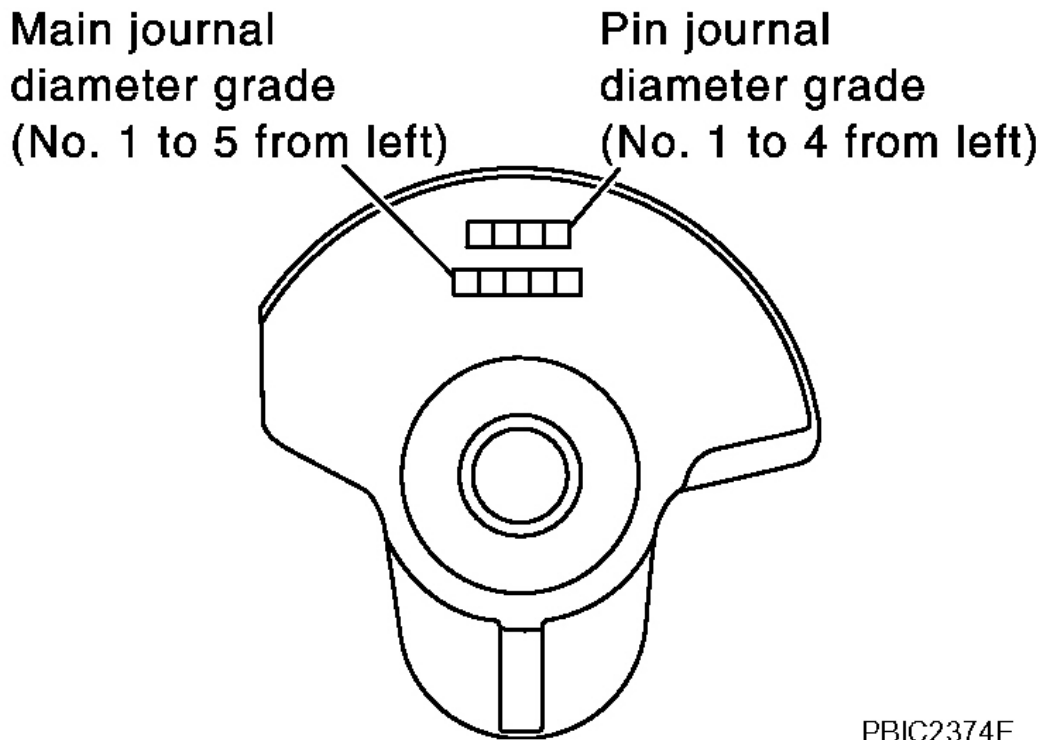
Identifying Pin Diameter Grade On Front Of Crankshaft
